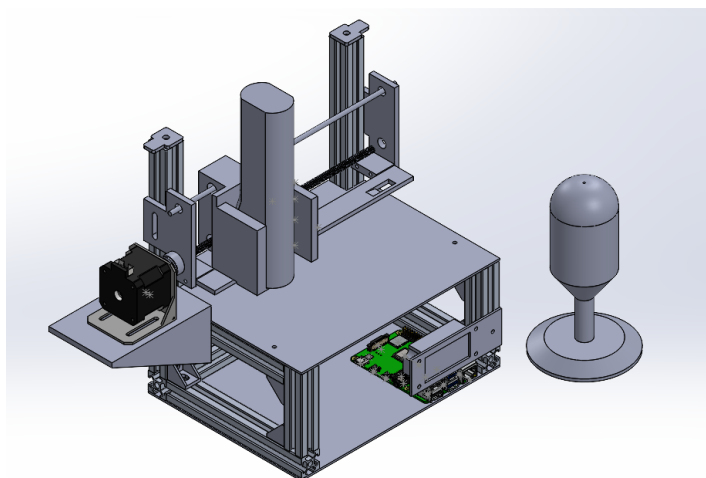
This is the CAD model of the automated rig drawn in Solidworks
